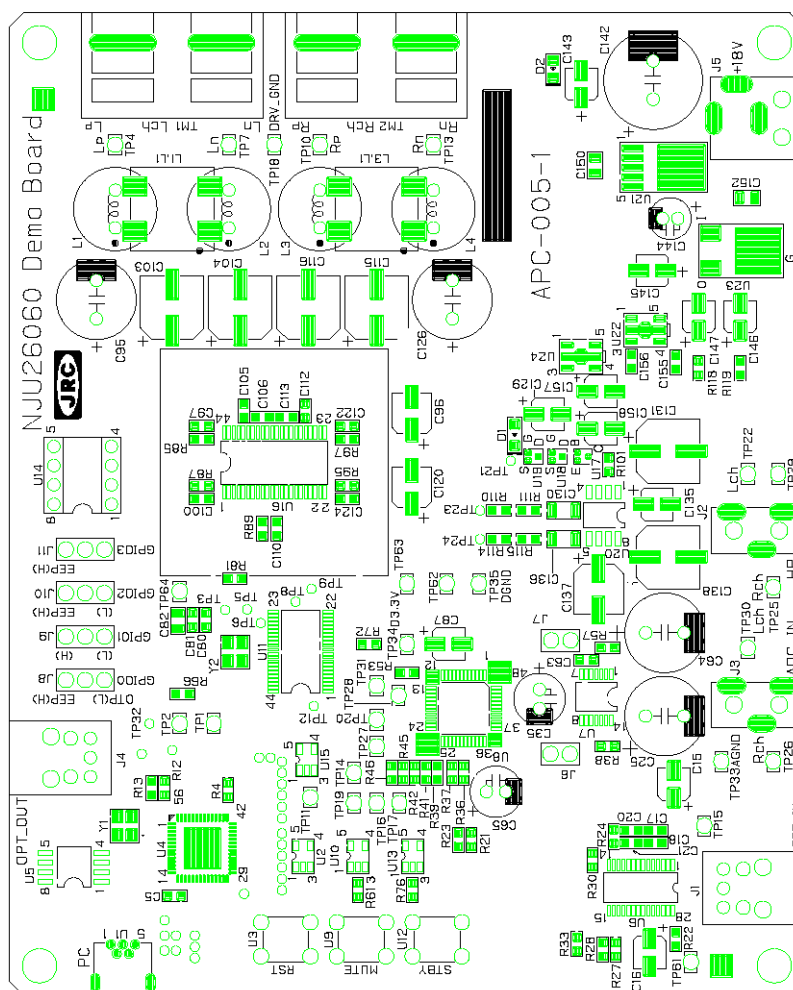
NJU26060 Demo Board (APC-005-1) component side silk
